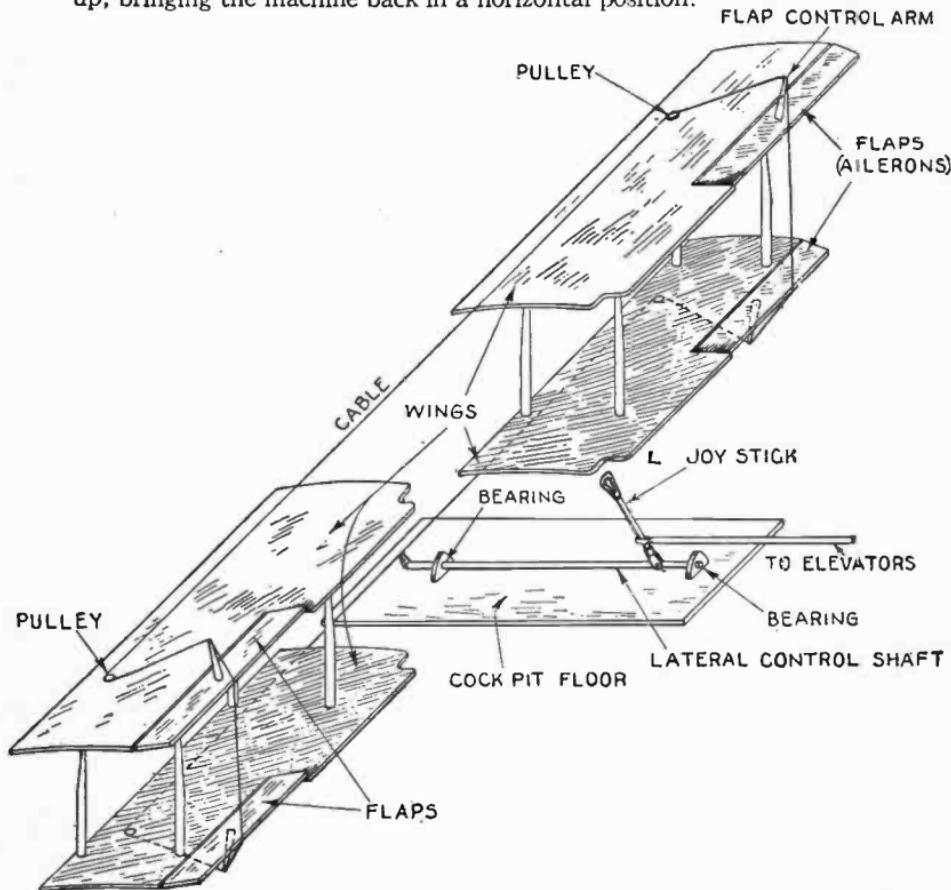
,113.—The lateral control. It consists of movable flaps, hinged to the trailing side of the wings at the ends as shown, and connected to the joy stick by suitable cable and pulley gearing. The gear is so arranged that the flaps on one side move in an opposite direction to those on the other side. On some machines only the top wing is provided with flaps.
